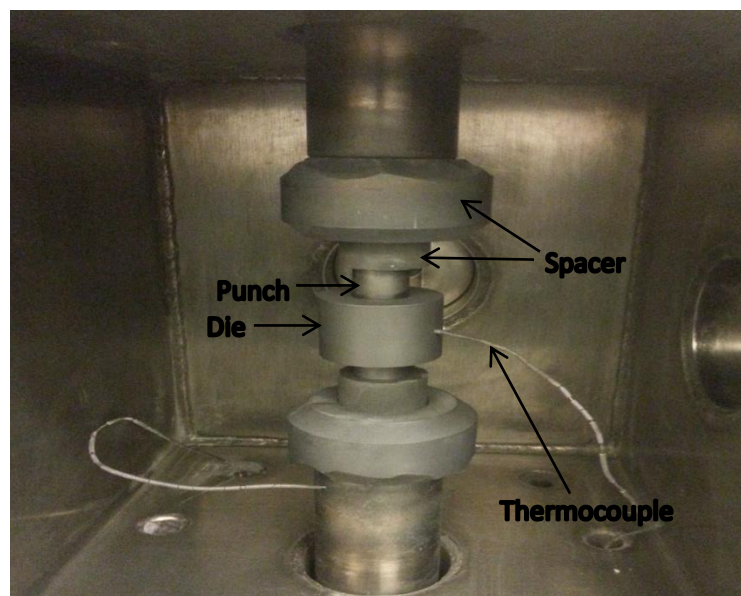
Die-punch-sample assembly inside the furnace of SPS setup
